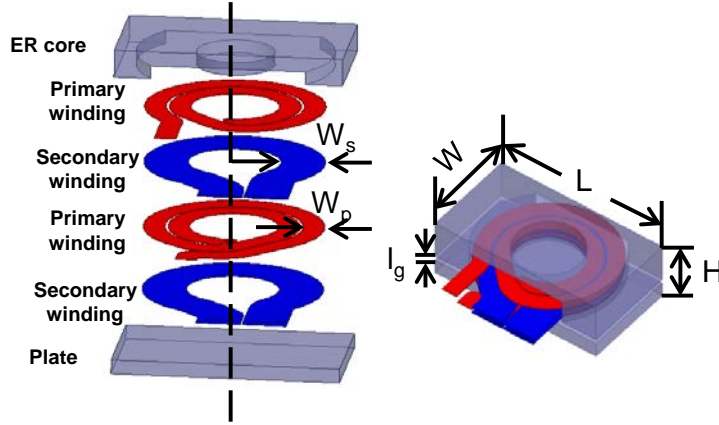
Exploded view of planar coupled inductors with four-layer winding structure.
